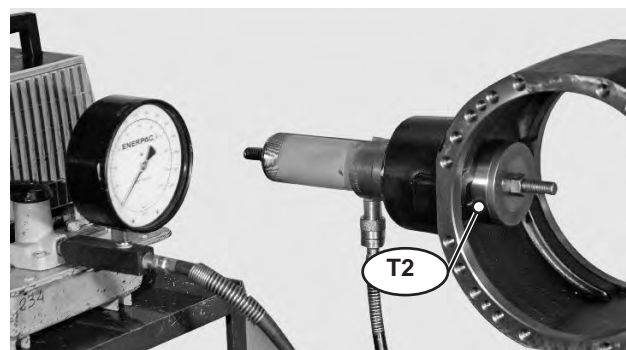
Connect the tension rod to the press and move the bearing cup of bearing cones (6) and (10) into the seats. Disconnect the press and remove the tension rod.
